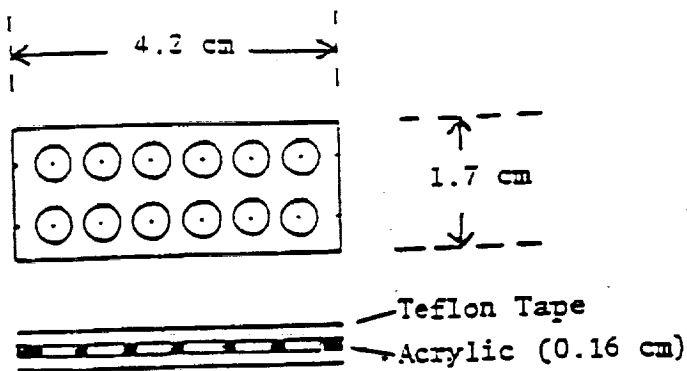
Dimensions and components of the outer PNTD stacks and the TLD holder - PNTD #5717
